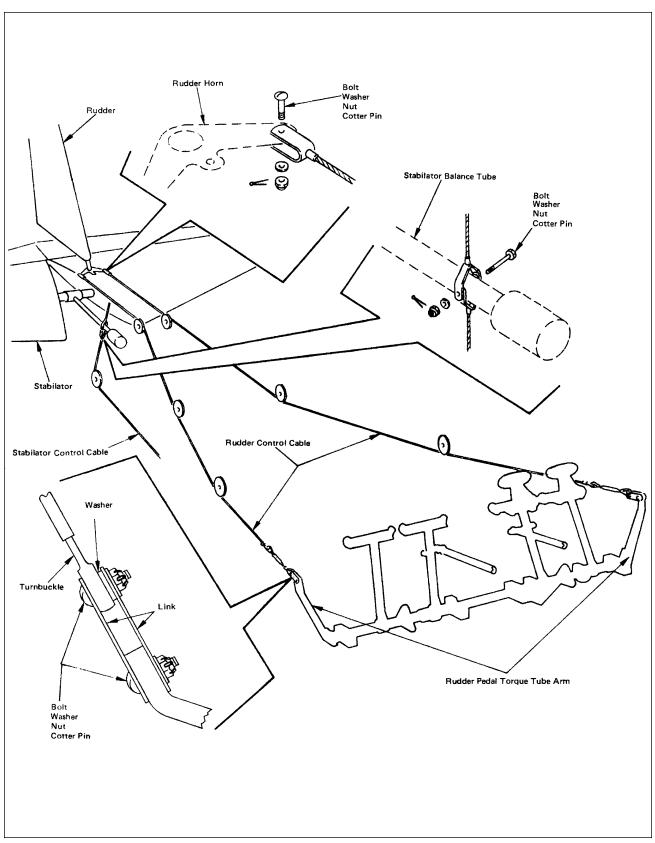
Stabilator and Rudder Control Cable Attachment Inspection
